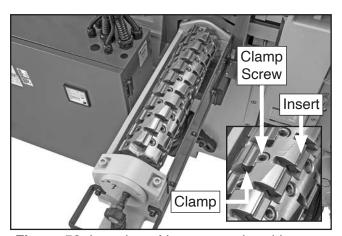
Location of lower cutterhead inserts, clamps, and clamp screws.
